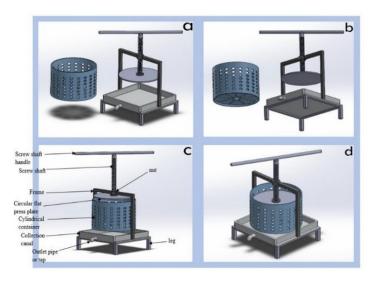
Shows the SolidWorks Design of the Gari Press (a-b) 3D Views of the Different Components of the Press (c) Exploded View of the Gari Press (d) Fully Assembled Gari Press
